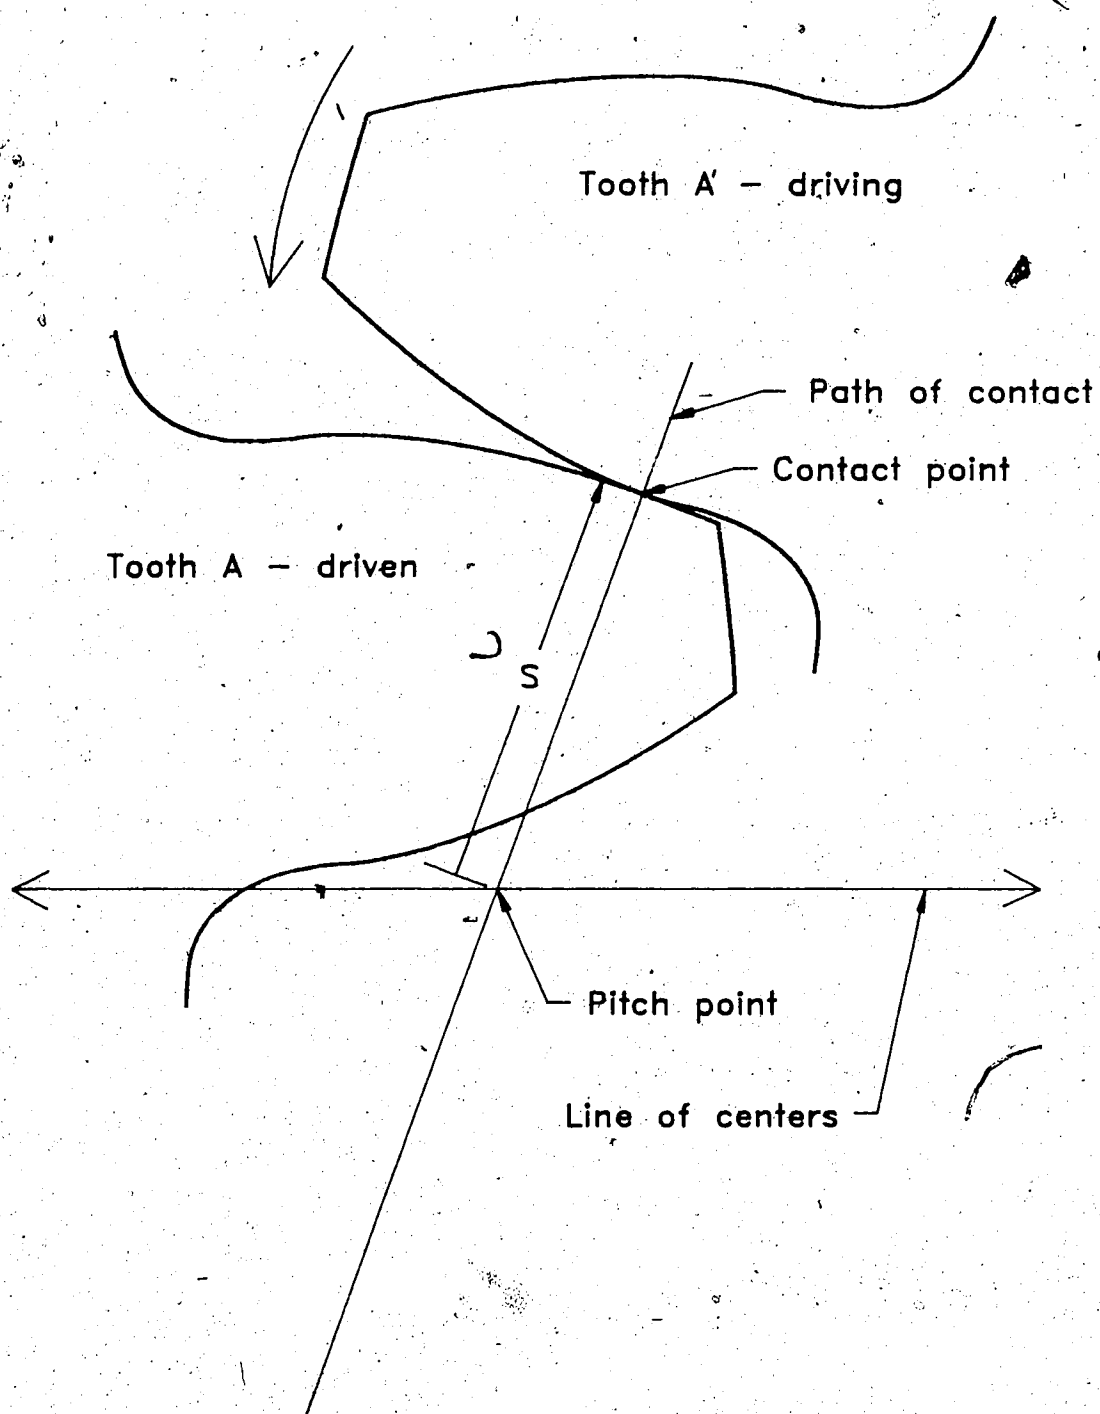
Transverse section of Tooth A' driving Tooth A.
